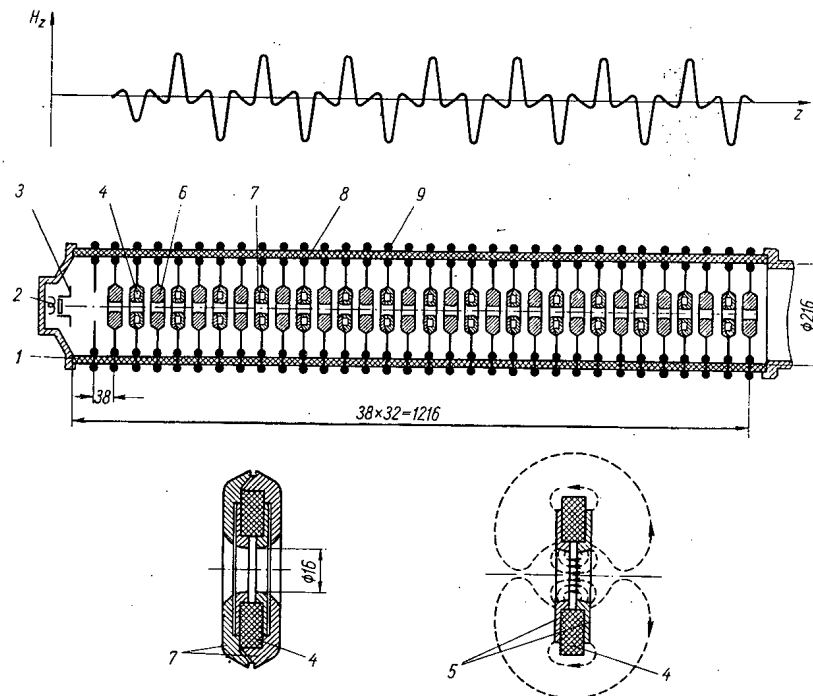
Construction of tube of ÉLT-1.5 accelerator: 1) tube insulator; 2) injector; 3) injector control electrode; 4) focusing magnets; 5) magnet pole pieces; 6, 7) shielding screens; 8, 9) potential rings.
